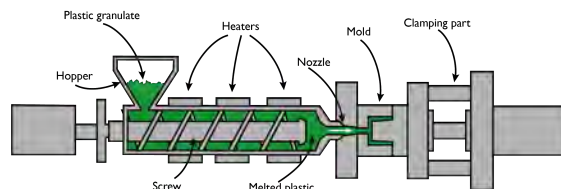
Schematic figure of an injection molding machine. Author's own copyright.
